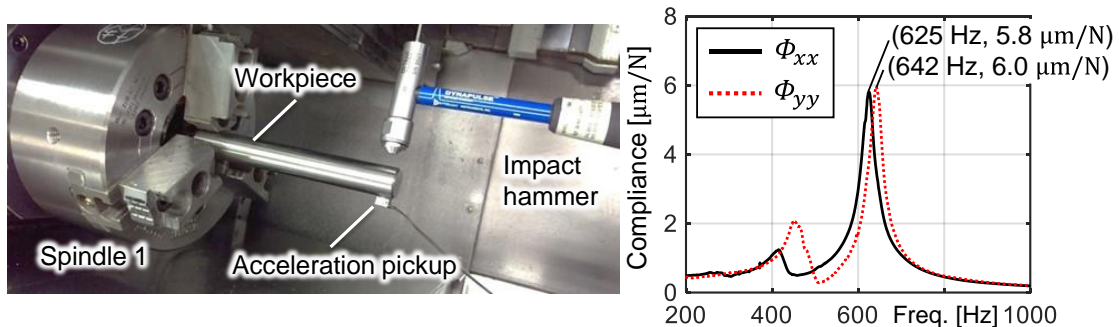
FRFs of flexible workpiece obtained by tap test
